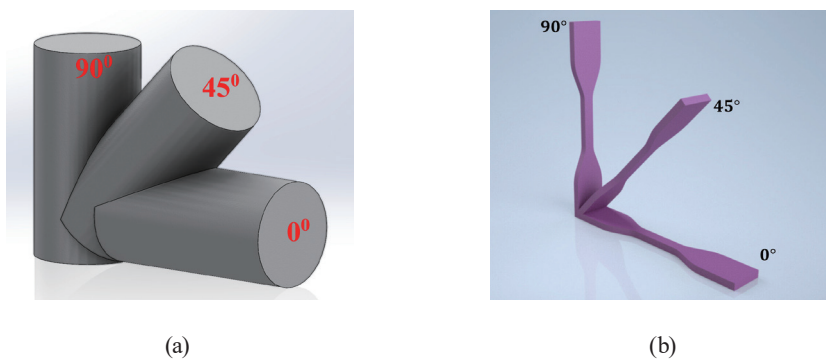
(Color online) Different printing angles for testing: (a) compressive and (b) tensile samples.
